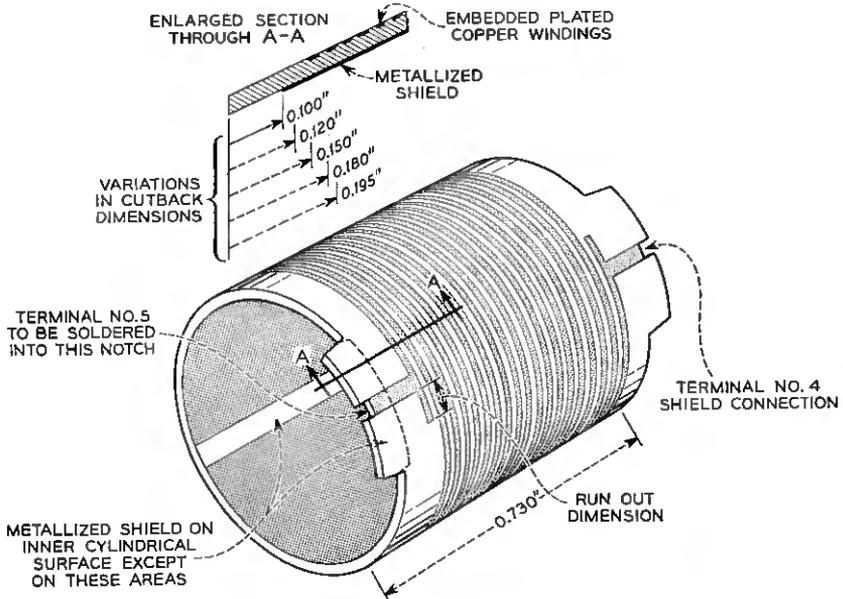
Side view of outer cylindrical spool, as per Fig. 6.
